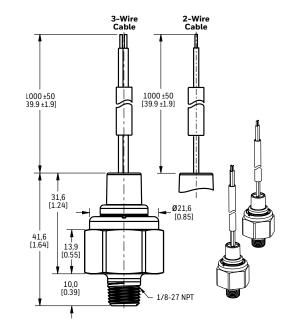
Cable Harness Mounting Dimensions Shown by Pressure Port Type (For reference only. mm/[in].)
